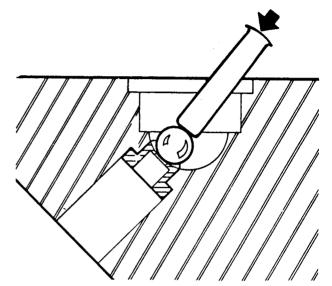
Removing hot plug A. Shroud B. Hot plug 1. Soft metal drift 11. To remove a hot plug, support the cylinder head face downwards on two pieces of timber, insert a thin soft metal drift through the injector shroud throat and tap the hot plug from the inside. Once removed in this way the hot plug must not be re-used.
